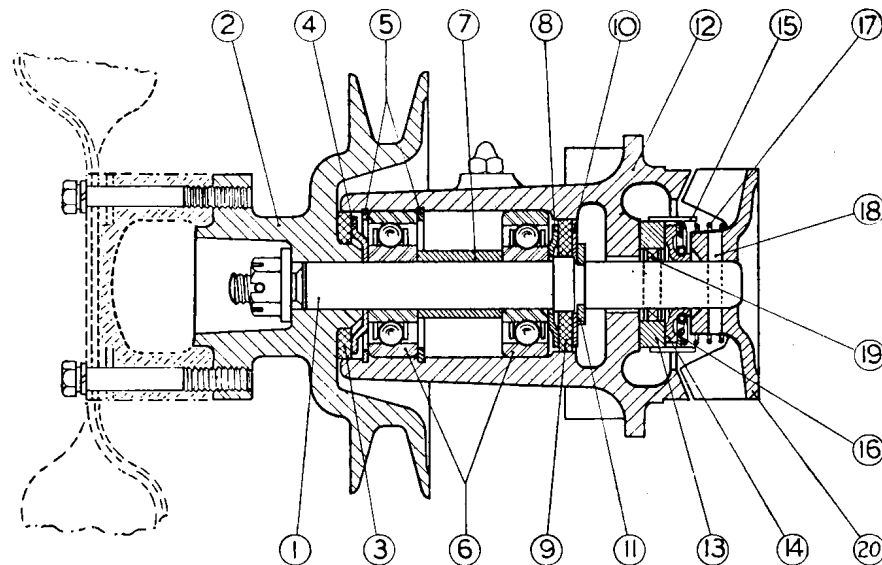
The water pump assembly on early models. Later models have a modified sealing gland (see Fig. D.6).
